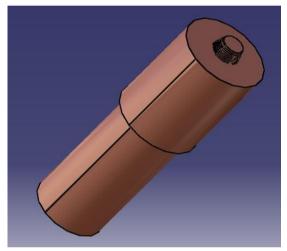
Taper Cylindrical threaded pin with triflutes 3D Model The tools (Fig 4) are specially designed with tapered cylindrical threaded profile & triflute pin and are accommodated in a predrilled hole along the weld interface. A constant axial force is used for the entire friction stir welding (FSW) experiments.
